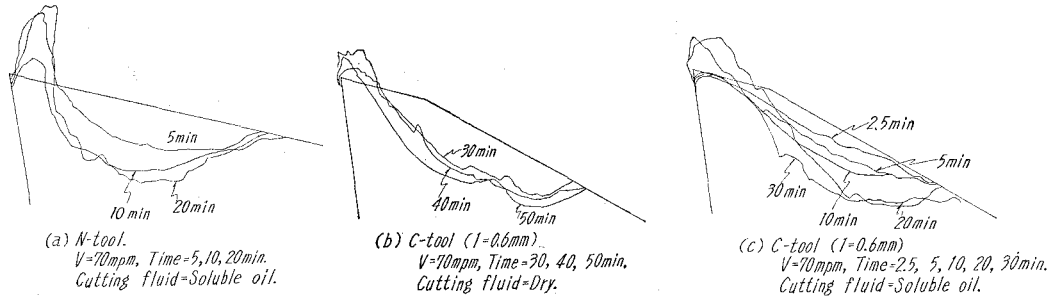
Crater traces cut away tools showing variation with cutting time. Cutting conditions: work, Killed steel; tool, SKH-4 (0, 15, (35), 7, 7, 15, 0, 0.5); depth of cut, 1.5 mm; feed, 0.3 mmpr; cutting fluid, dry & soluble oil (1:20).
